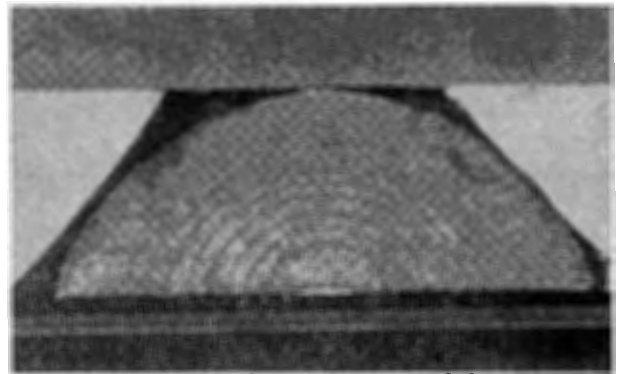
Macroscopic appearance of fracture surface.
